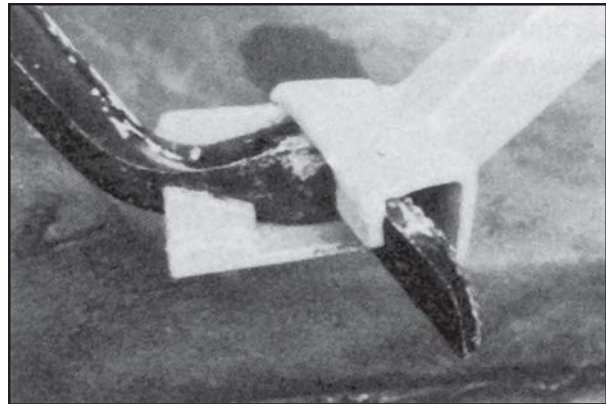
Brake pedal extensions constructed of barstock welded to the pedals.
